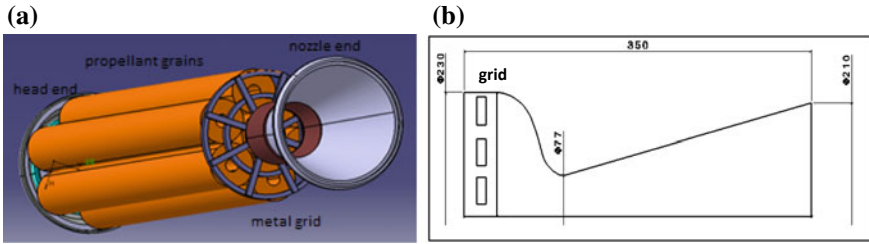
a Rocket motor assembly with cluster of 7 grains, b Dimensions of NE along with NE grid.
